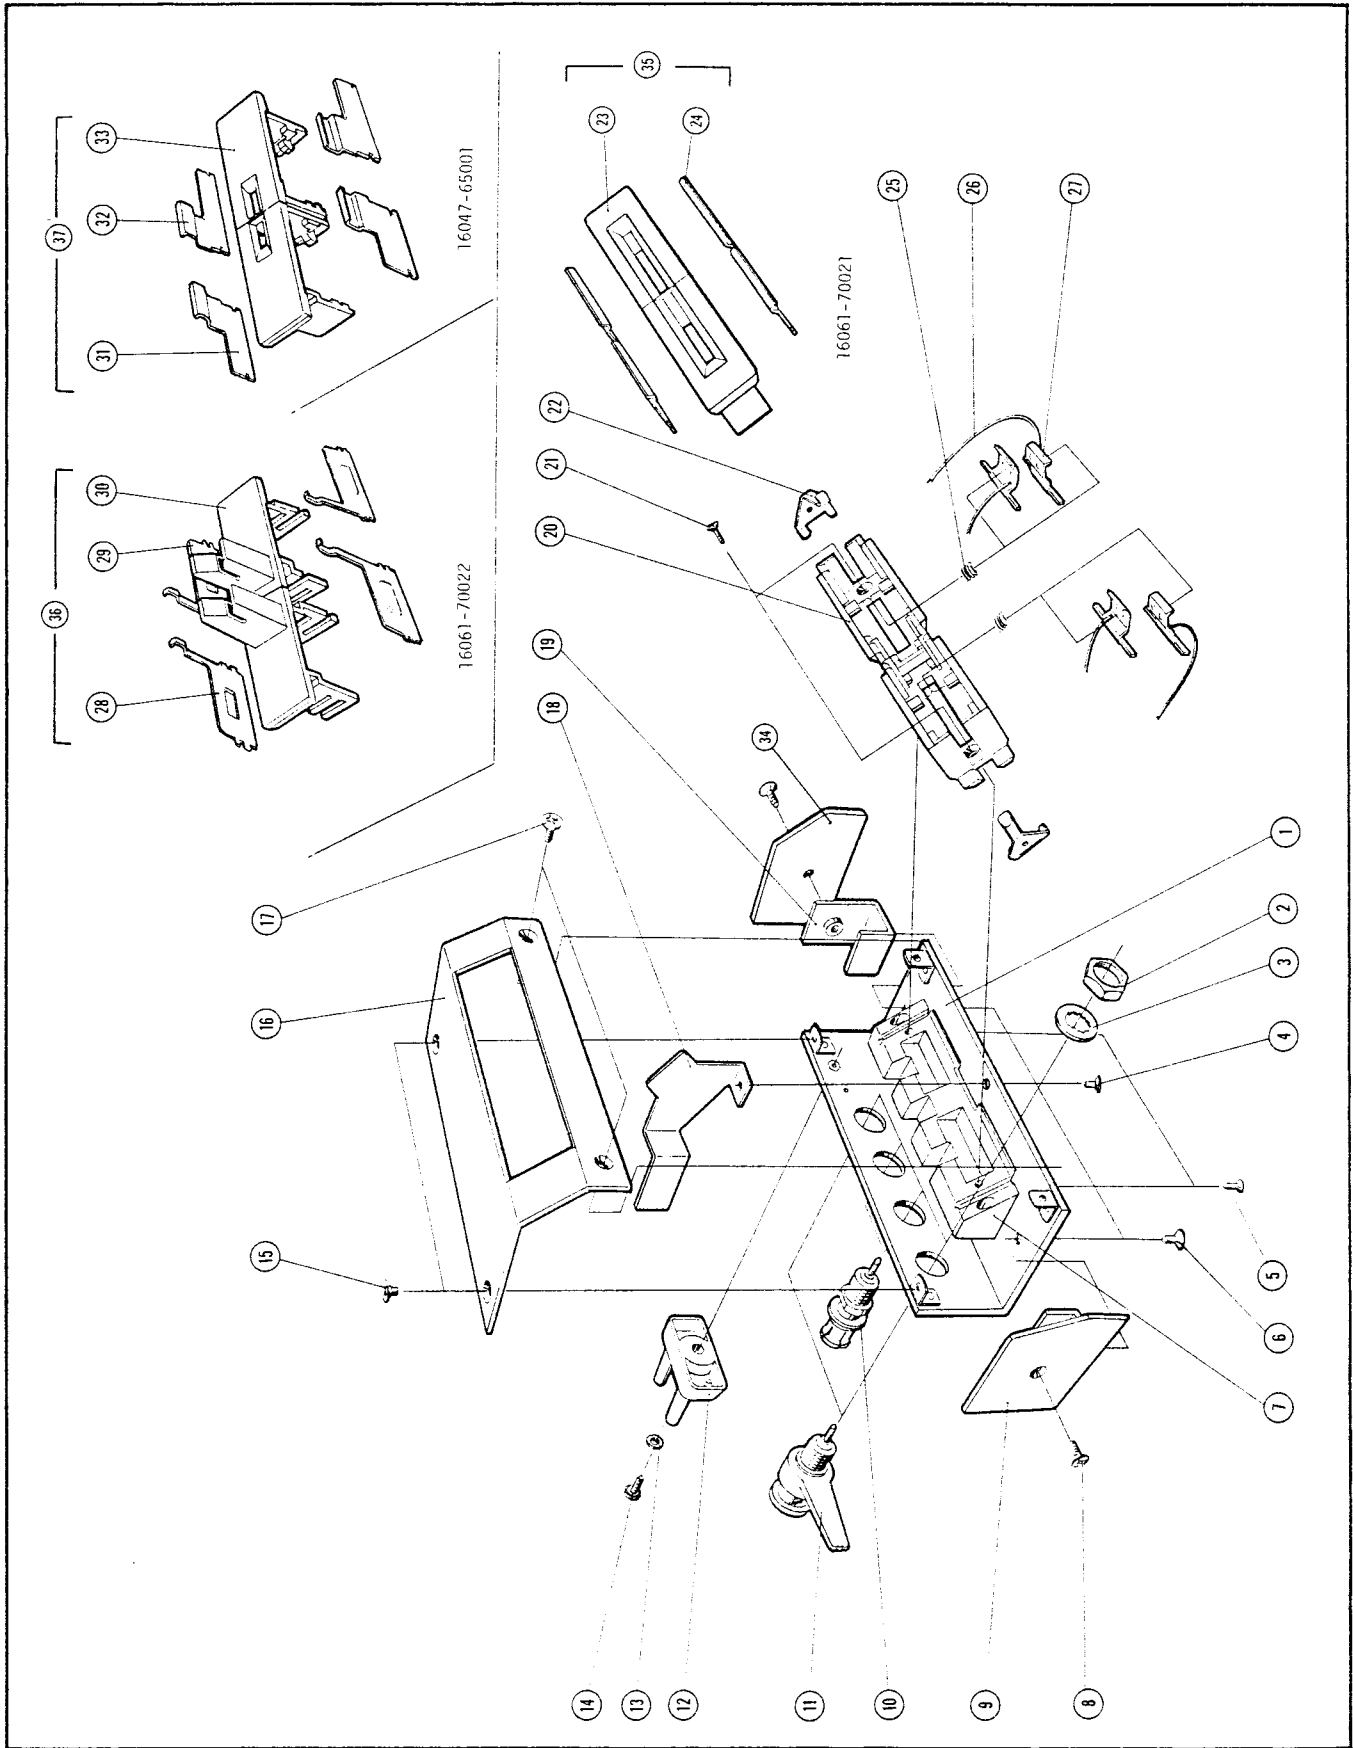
Parts Identification for 16047A (Sheet 1 of 2).
